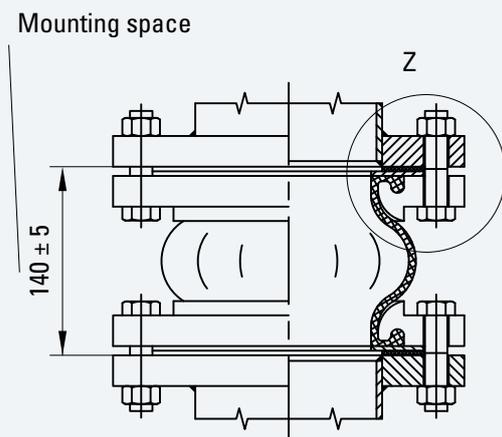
Rubber expansion joint with dimensions [mm]
